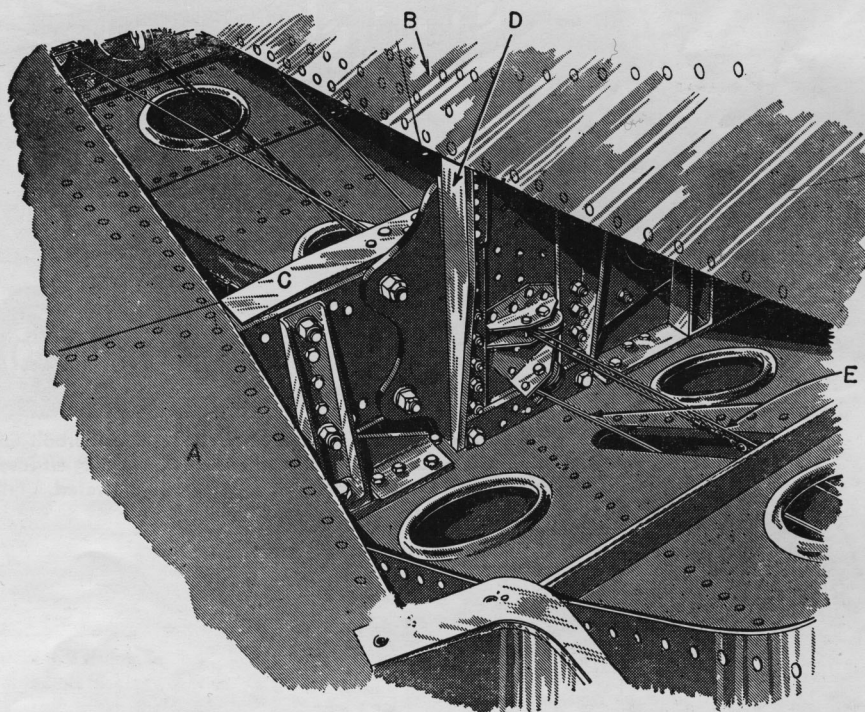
Fillet removed between stabilizer (A) and fin (B) of a P-47N to show the front stabilizer spar (C) and built-up fitting (D) for attaching the fin spar. Cables (E) lead to the rudder and rudder trim tab.
